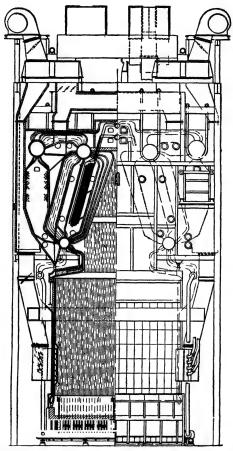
b—A 1,000,000-lb per hour, 1425-lb pressure, 925°F double-set bent-tube Combustion Engineering boiler installed at Logan, W Va, Station of the Appalachian Electric Power Company. Pulverized coal is burned in a dry-bottom furnace
